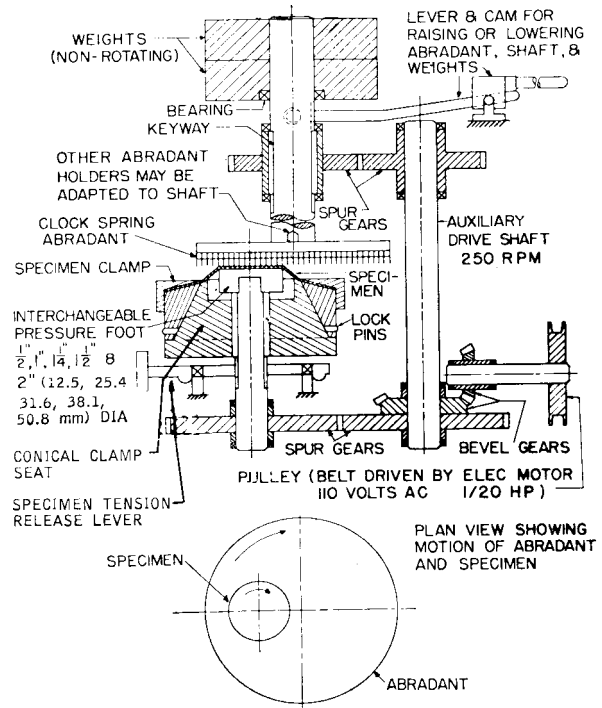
Schematic Diagram of Uniform Abrasion Testing Machine
